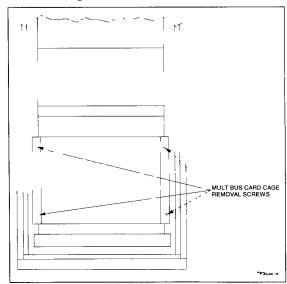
8. Multibus Card Cage Removal for IIOIS40A Cabinet
